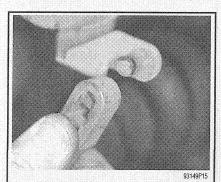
Push on the clip to relieve the tension and pull the height adjusting sensor off the stud
